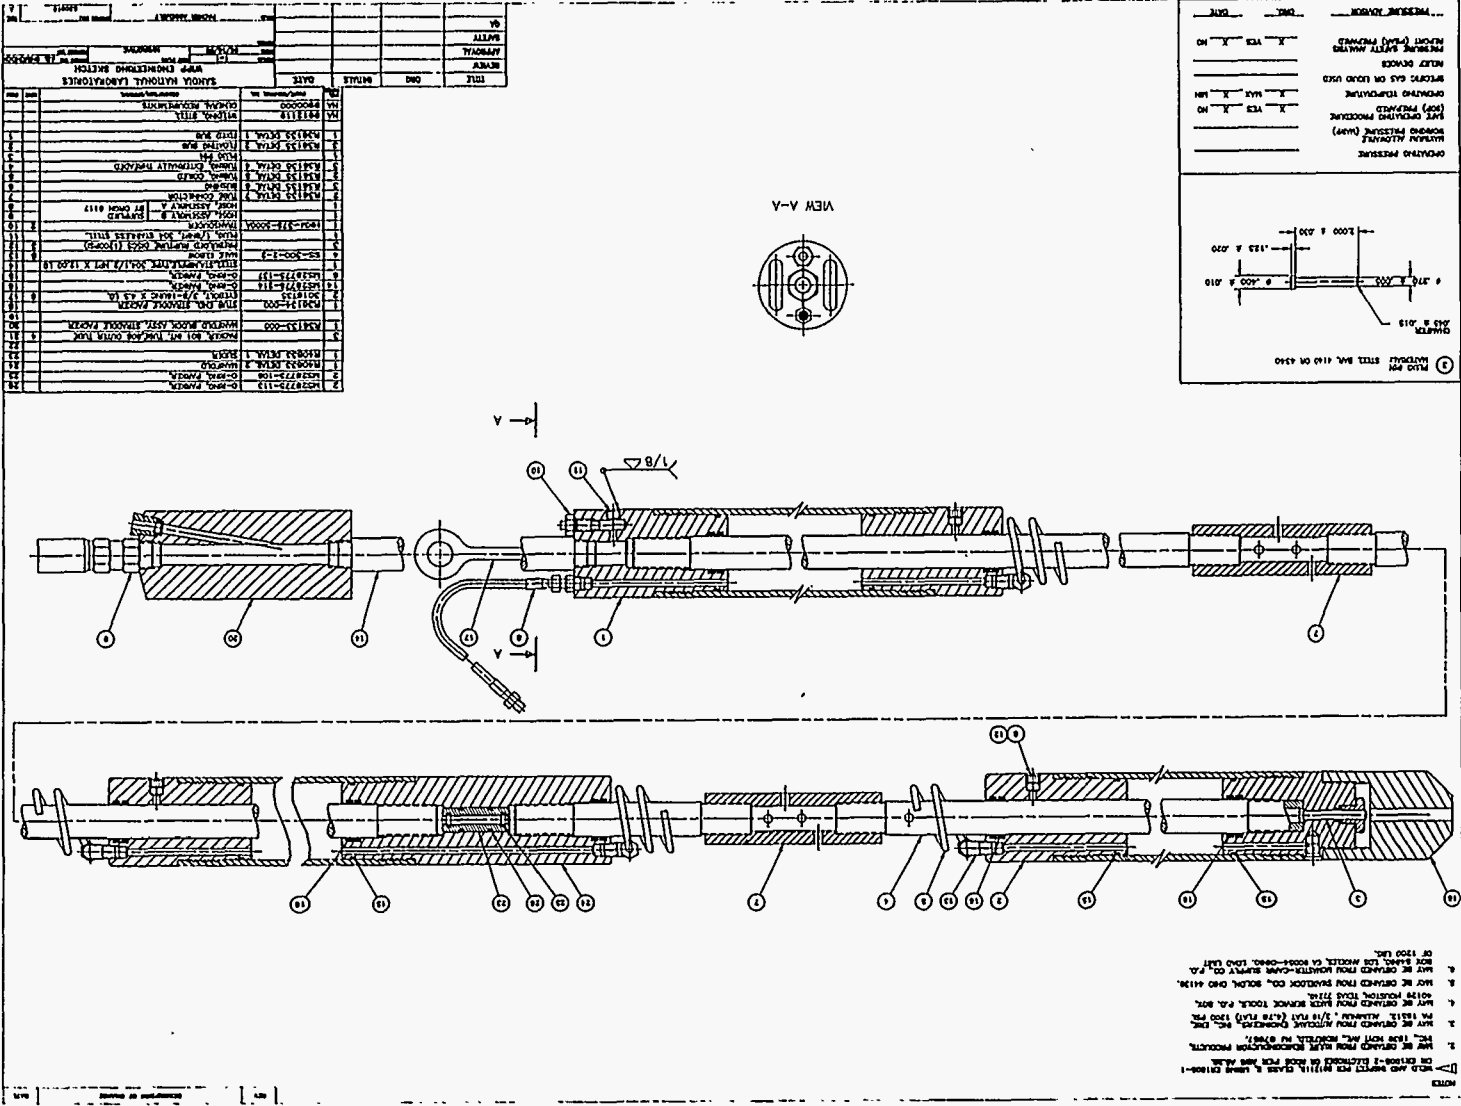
Assembly drawing of single-zone, 2-packer systems used for hydraulic fracturing tests in MB139.
